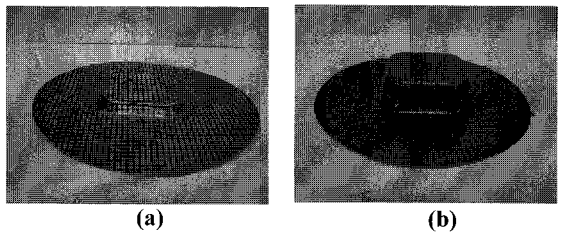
Drawing failures for set #4 (a) after 5mm drawing at 200°C, (b) after 15mm drawing at 250°C
